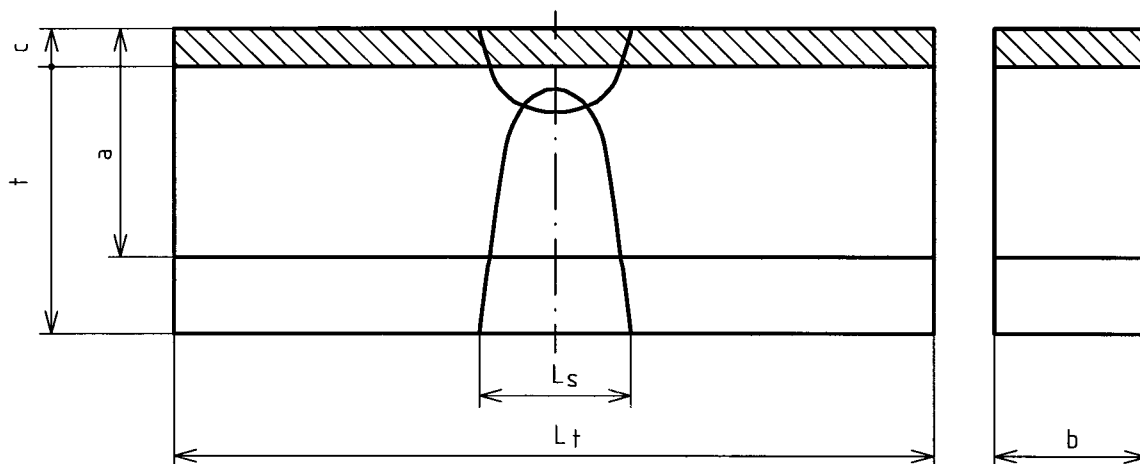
Face bend test specimen of cladding with a butt weld (FBCB)
